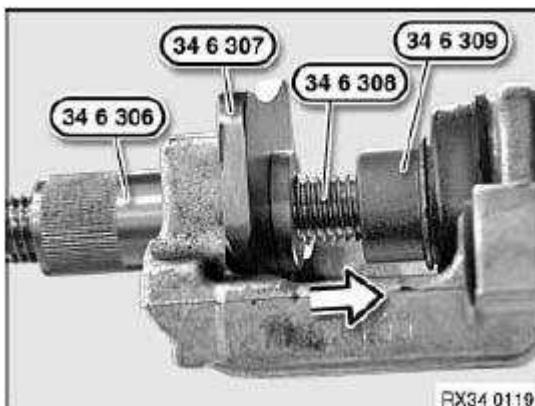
Identifying Special Tool 34 6 309, 34 6 306, 34 6 307 And 34 6 308
